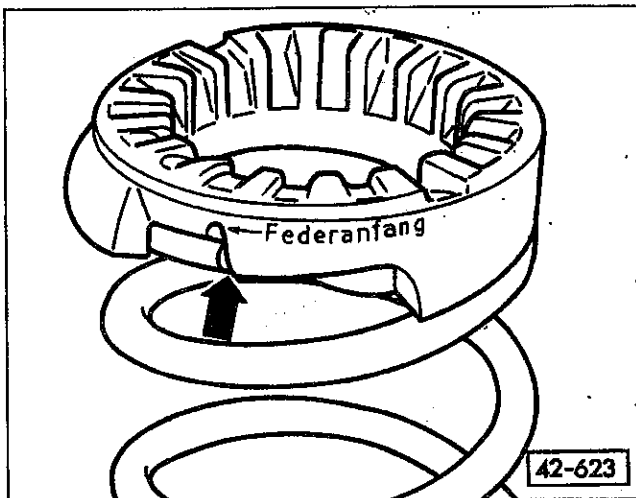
End of coil spring aligned with notch in upper spring seat (arrow).
